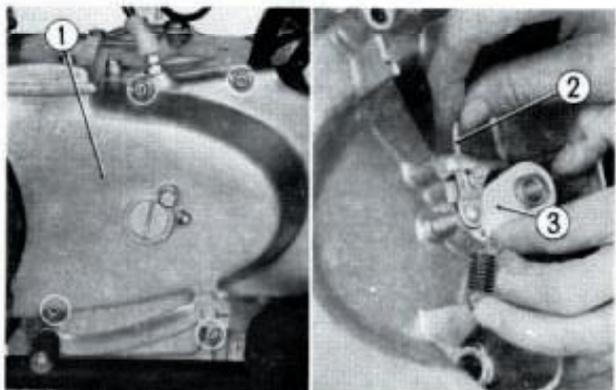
① Left crankcase cover ② Clutch cable ③ Clutch lifter
